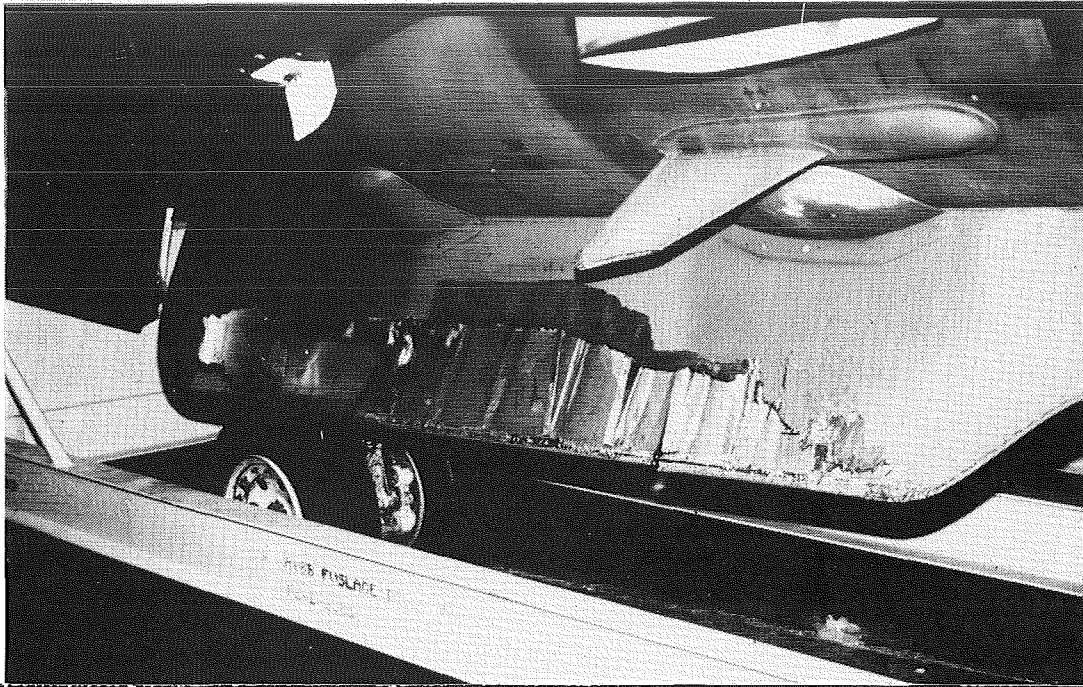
PHOTO OF CRASH DAMAGED TAV-8B STRAKE
